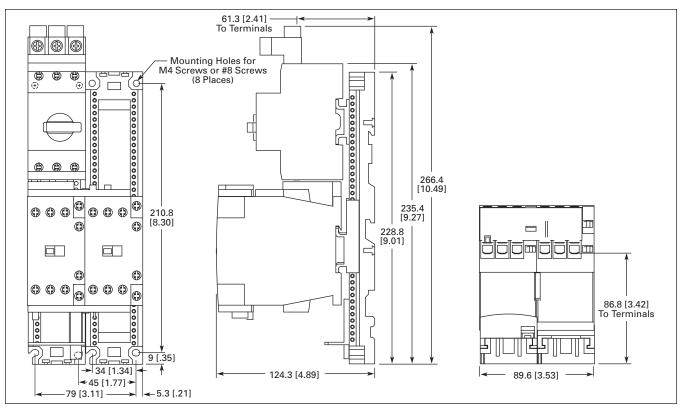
XTFR...BC\_ — Approximate Dimensions in mm [in]
